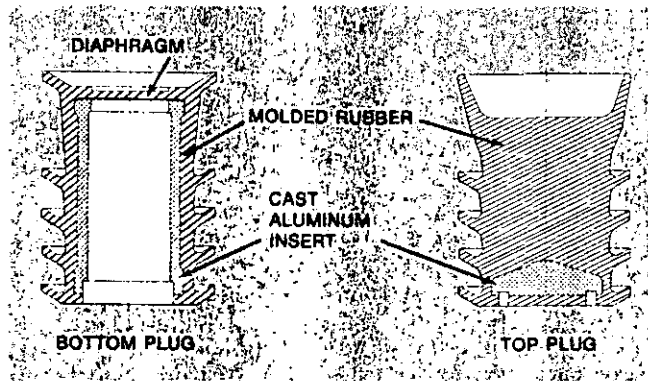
Top and bottom wiper plugs. Diaphragm in bottom plug ruptures with pressure increase to allow slurry passage. Solid plug, right, follows slurry. All plug material is drillable.
